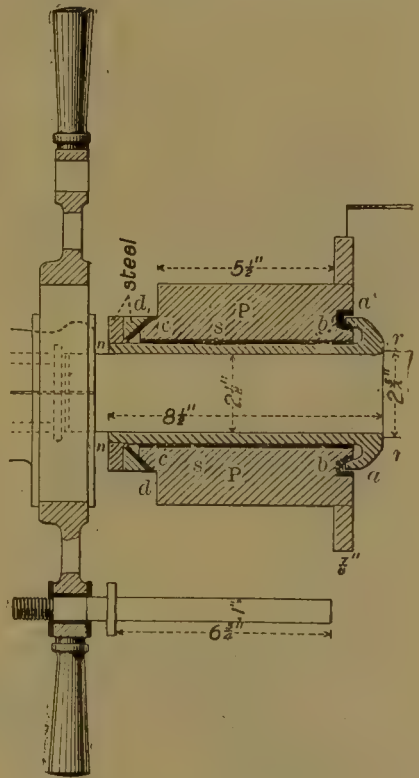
Commutator of Johnson & Phillips' Bipolar Machine.
